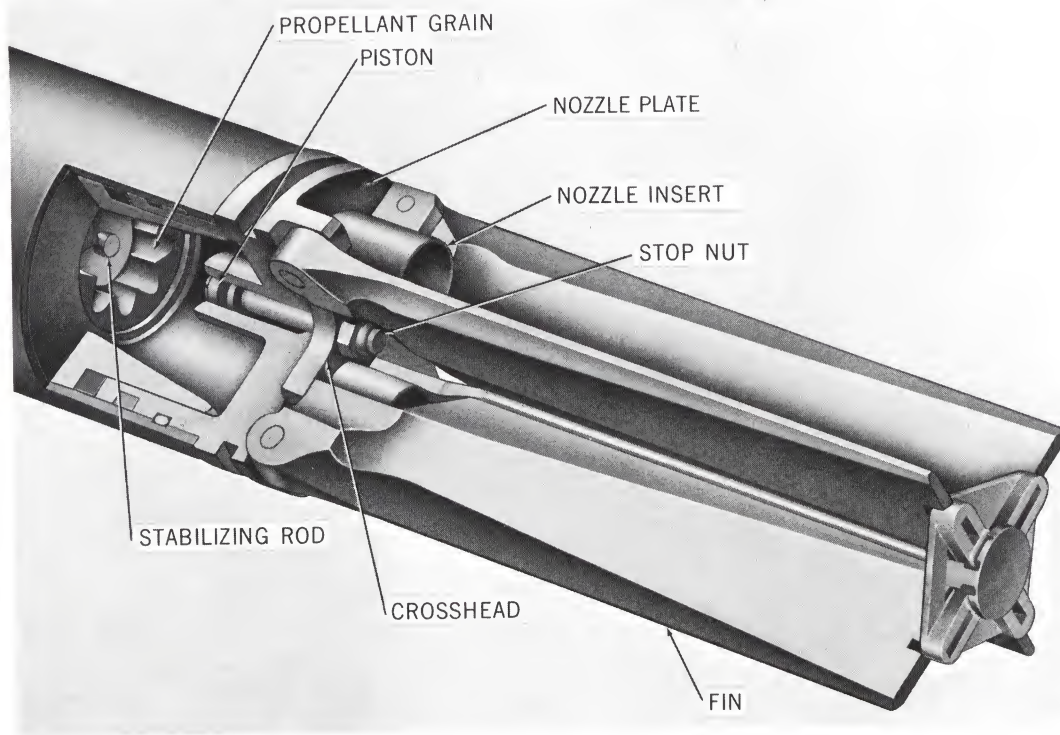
Nozzle-Fin Assembly, Cutaway View.
